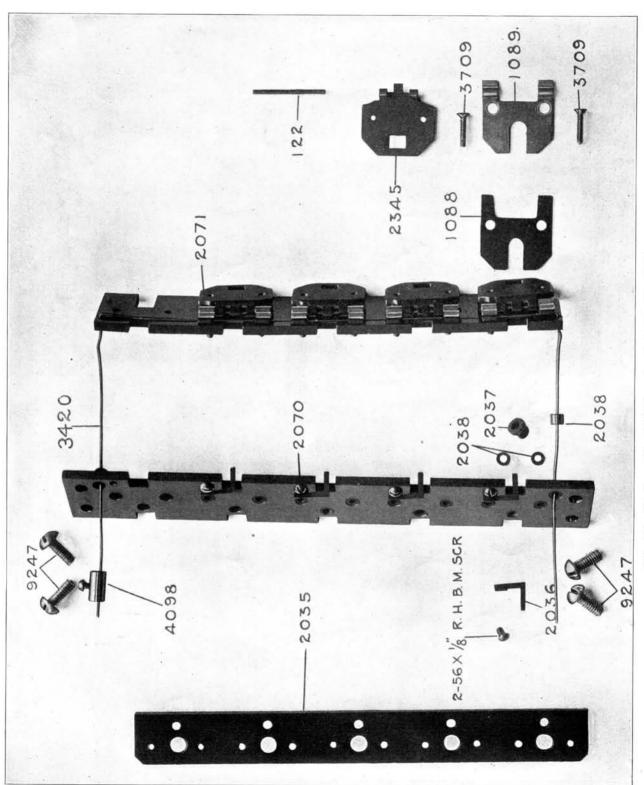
Type No. 115—Mounting Strip for No. 8 Drop
